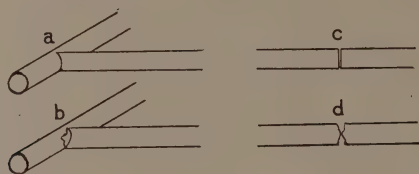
a and c—close approximation of parts to be soldered. b and d—imperfect contacts.
